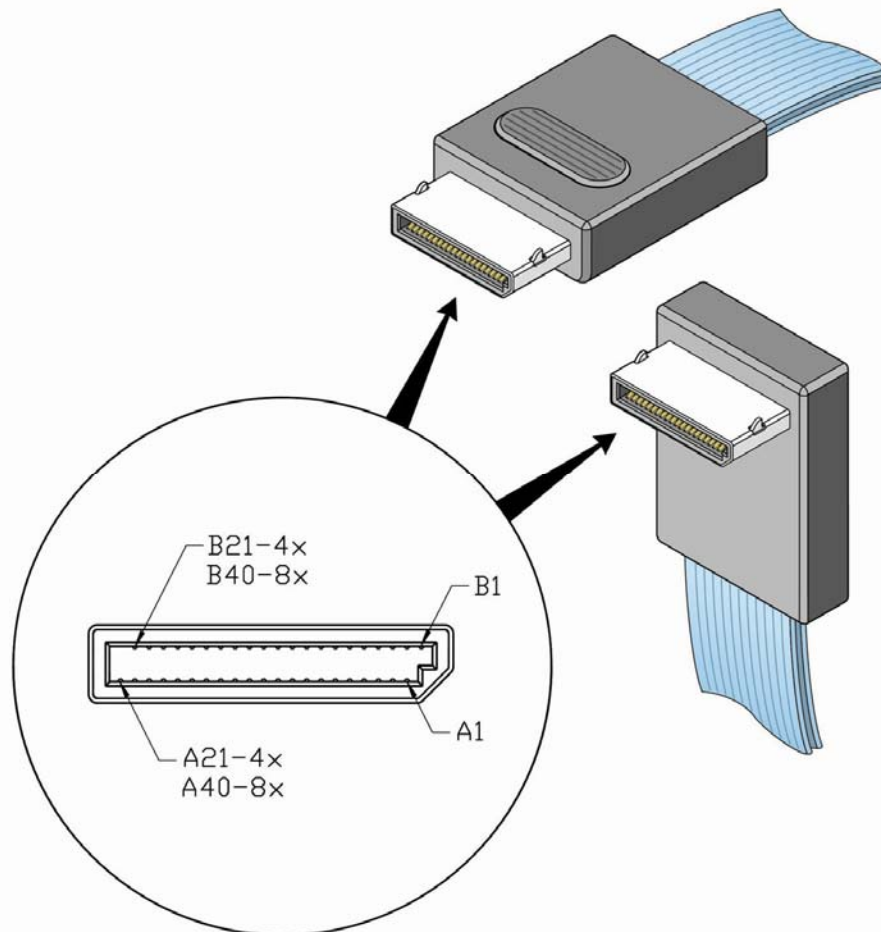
CONTACT NUMBER LOCATIONS FOR FREE CABLE ASSEMBLIES
